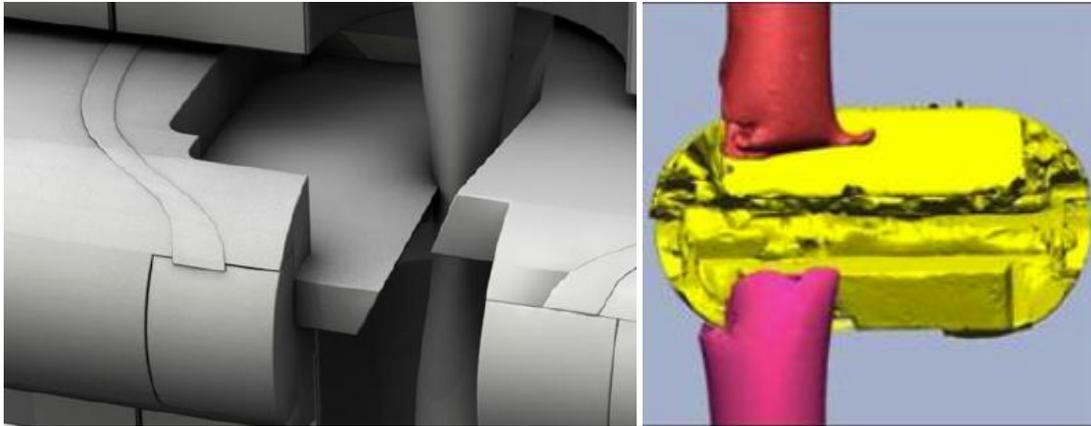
Drill pipe positions in blind shear ram: normal and off-centered for Macondo¹³²
